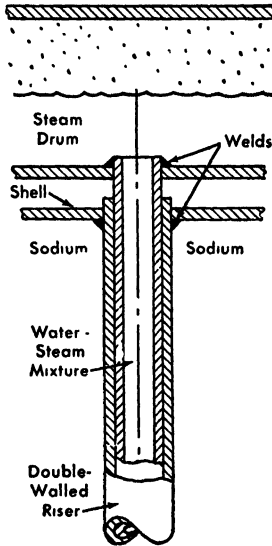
Schematic drawing of steam generator tube configuration. (GNEC)
